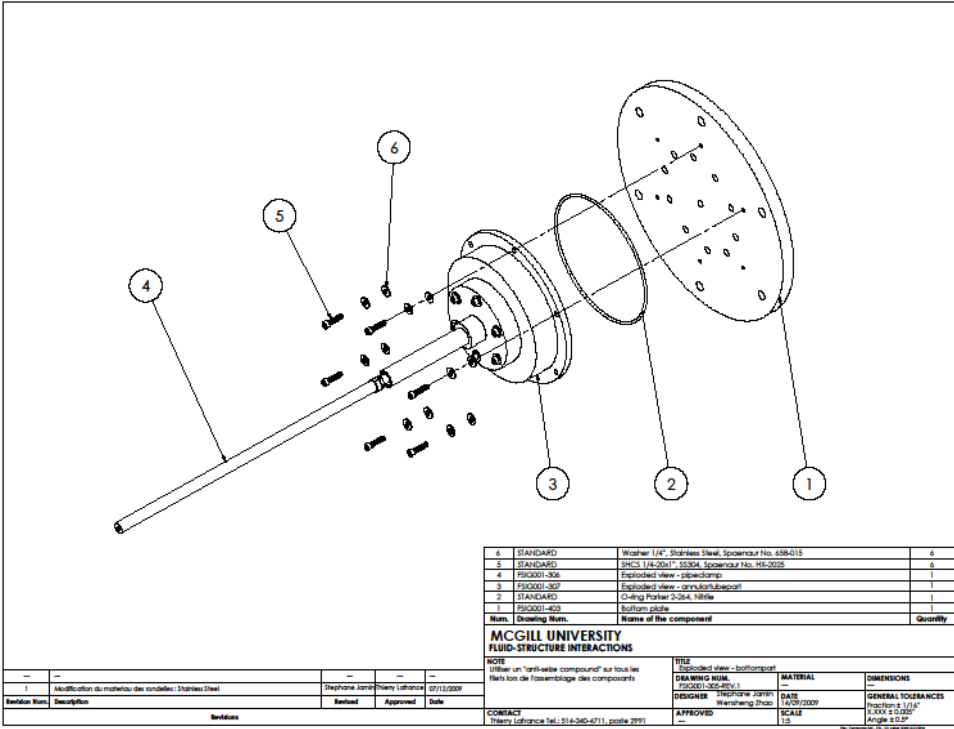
Sub-assembly drawing for the vessel: Bottom part
